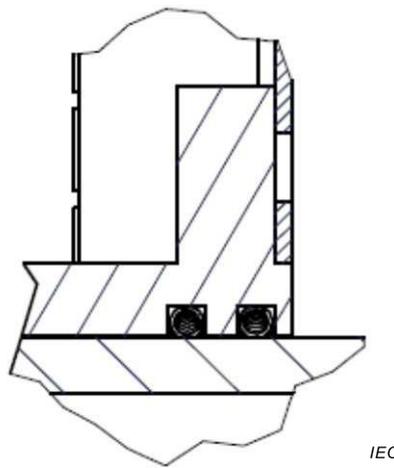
Detail G of figure F.2: contact between plane and tube-in-tube
